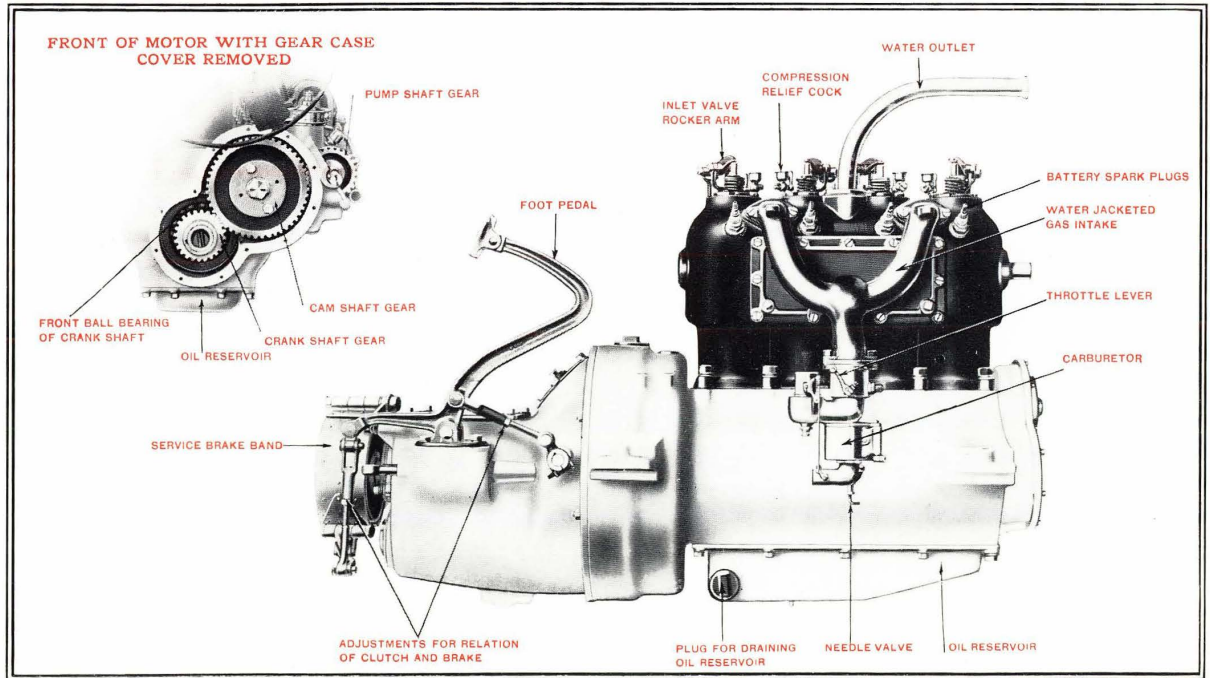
Intake Side of Motor and View of Gear Case—Chalmers "30"
